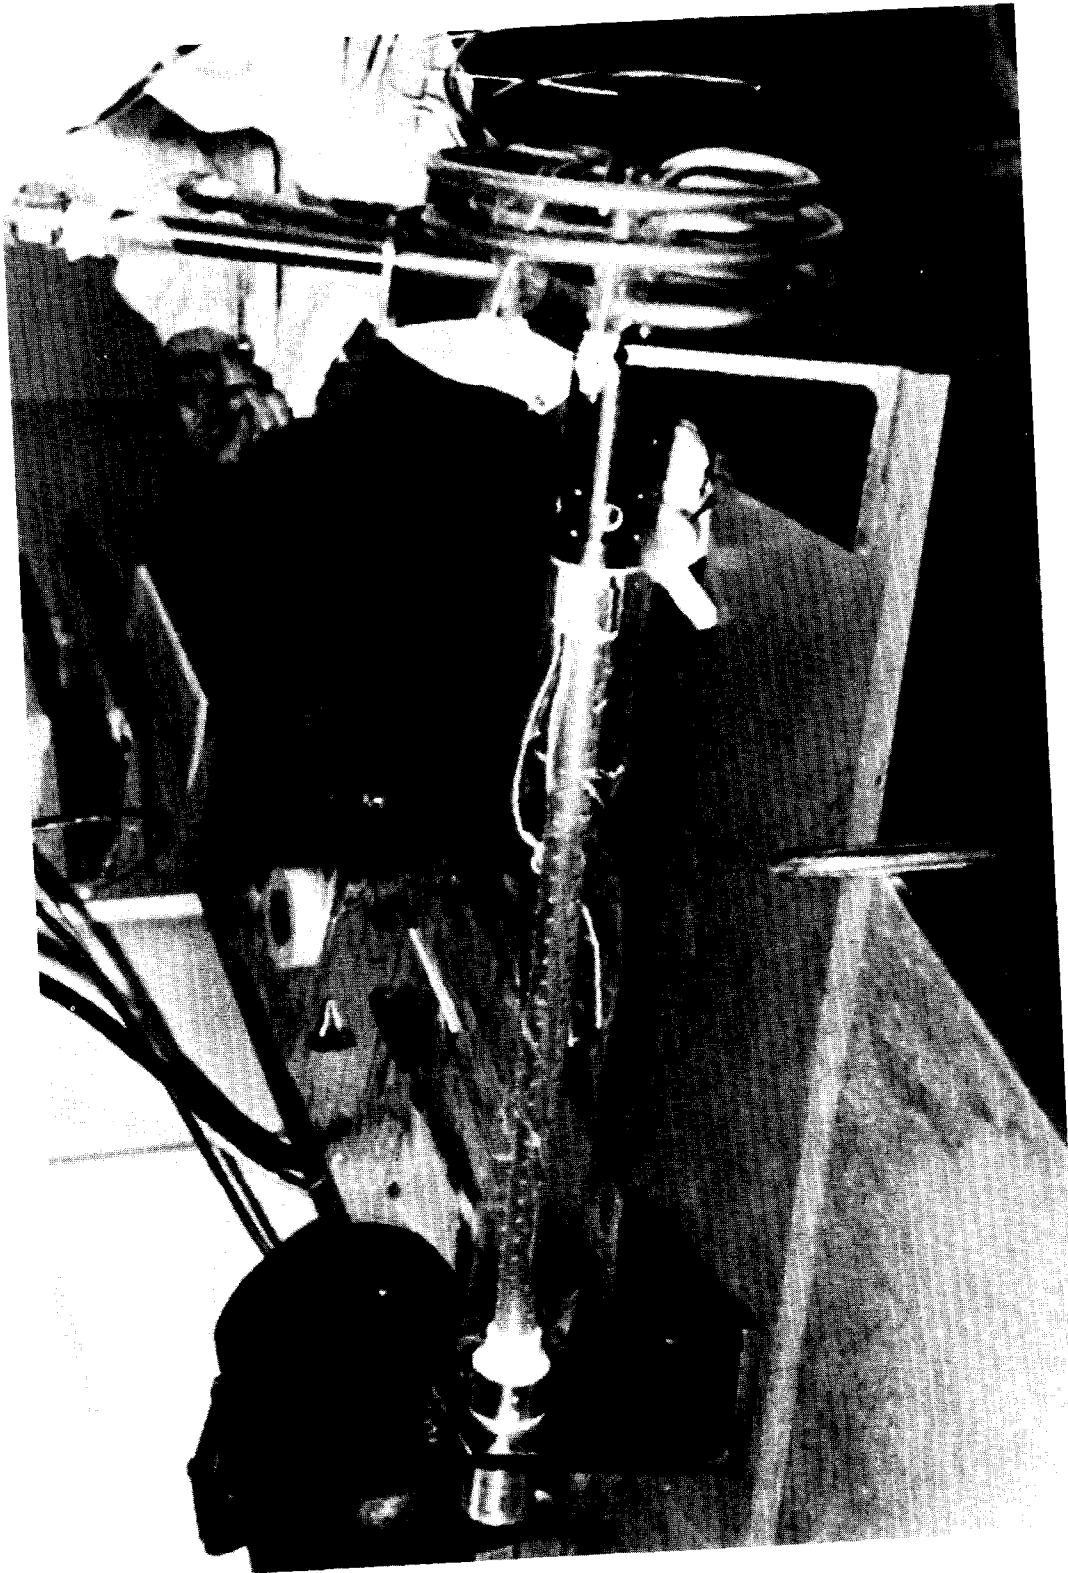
Quantity probe and coil assembly in welding jig.
